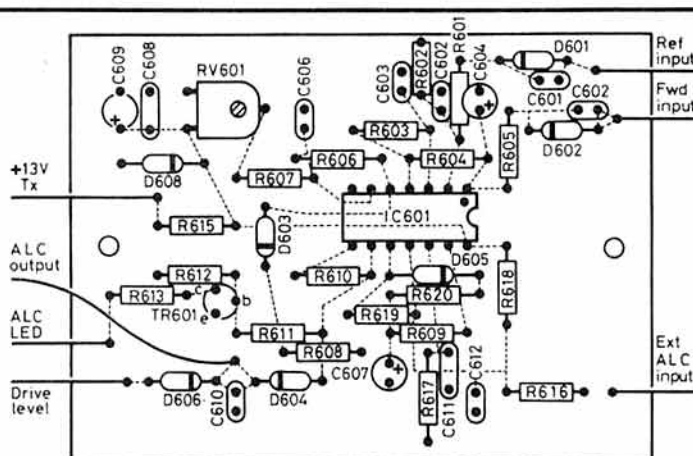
COMPONENT LAYOUTS FOR THE ALC PCB.
